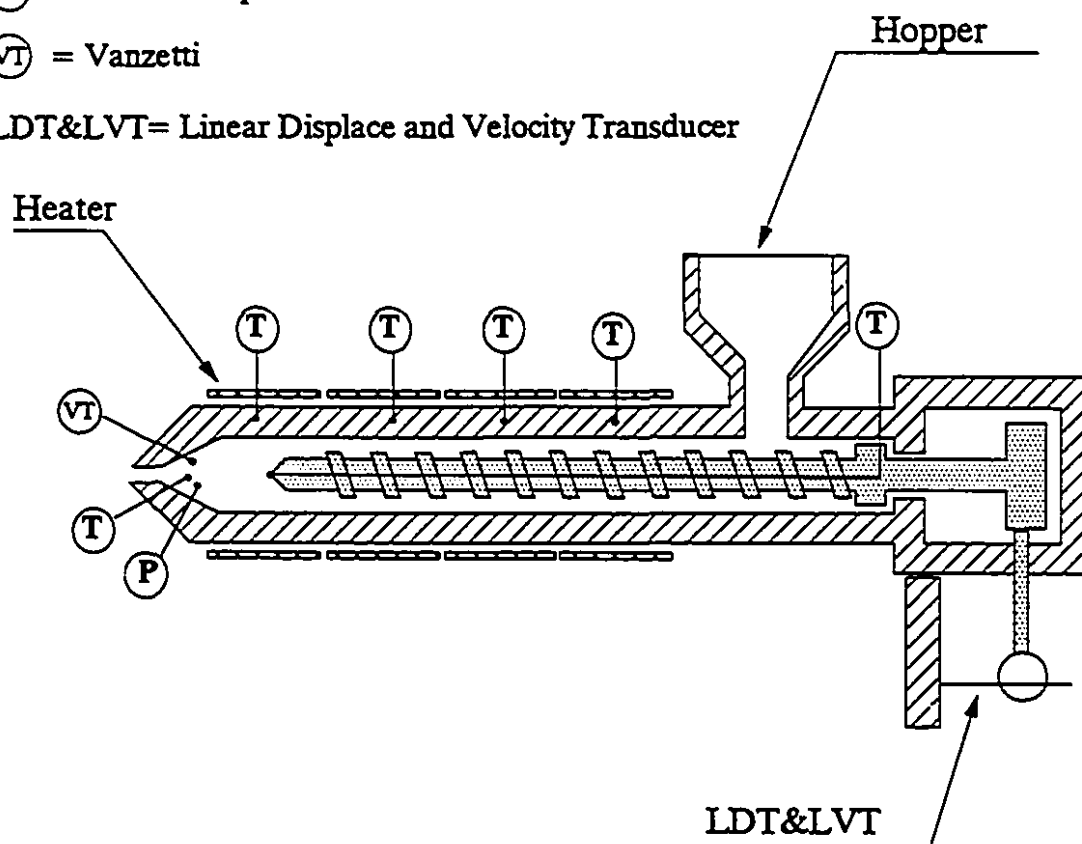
Instrumented barrel and screw of the injection molding machine
